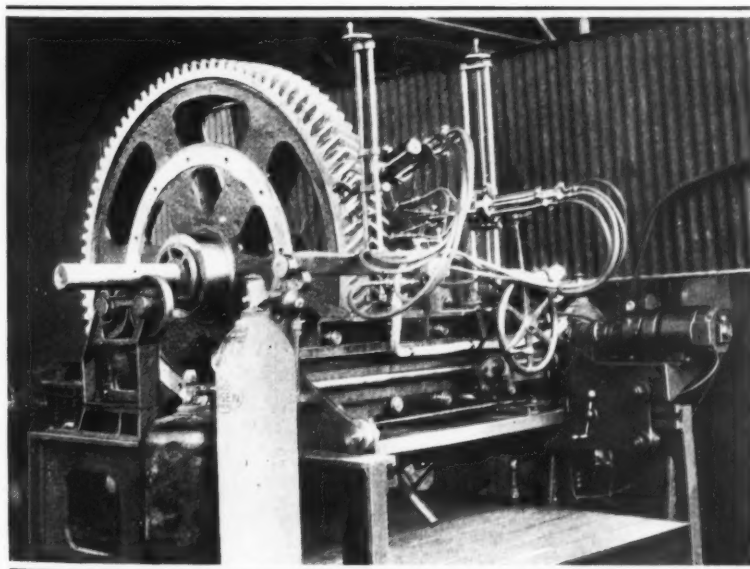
Farrel-Birmingham Machine Designed for Hardening Gears by Applying Gas Torches and Streams of Water
